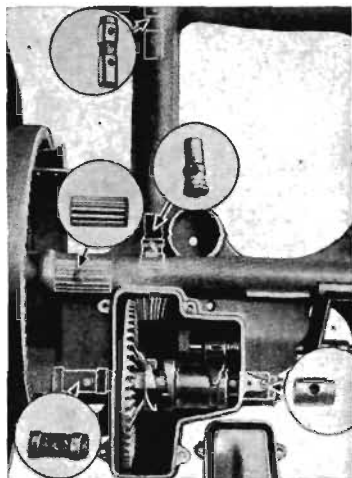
Gear transmission of a mower, showing spur and bevel gears, clutch, bearings, and bushings. The bevel gears run in an oil bath, which is enclosed and dust proof.
